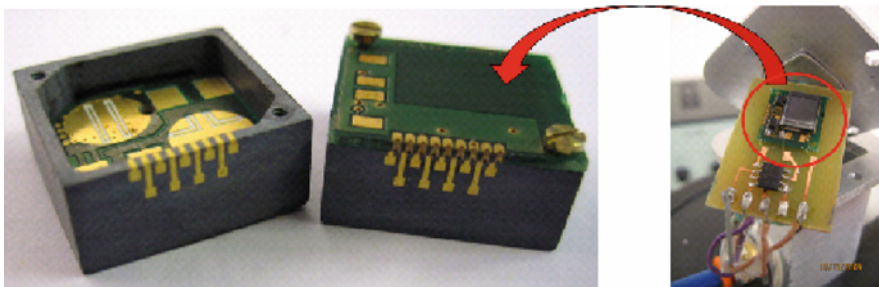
Fully assembled TPMS demonstrator (vibration scavenger version)
